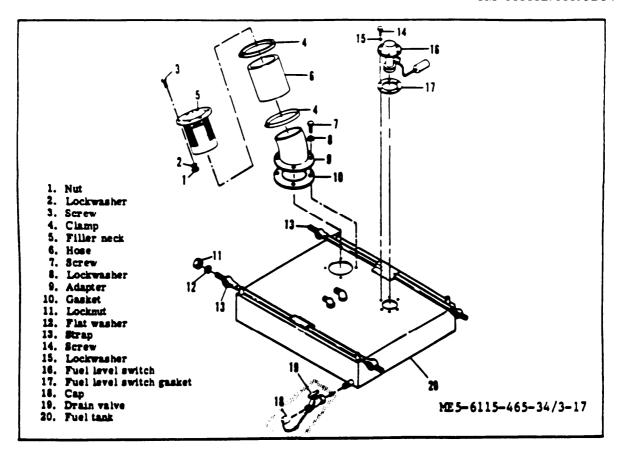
Main Fuel Tank (Metal), Removal and Installation
